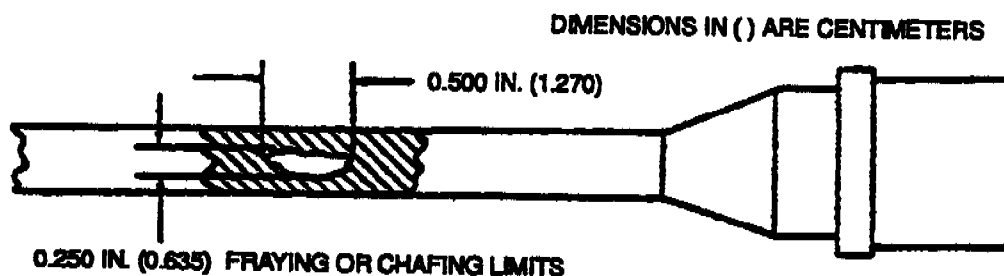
Exhaust Thermocouple Assembly Inspection.
